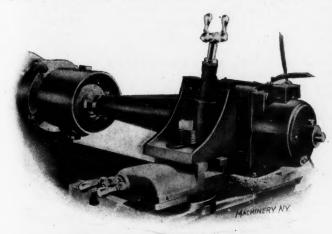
Lathe Grinding Attachment, with Extended Spindle for Internal Work
